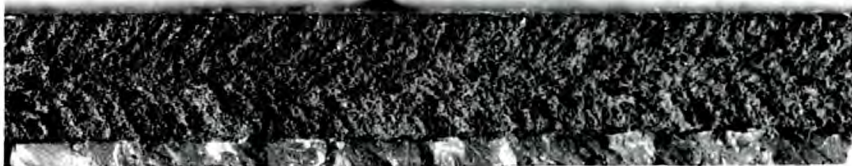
Fracture surface with the photoelastic coating, the fracture was half way along this section when fig. 7.9 was obtained. (Scale full size)
